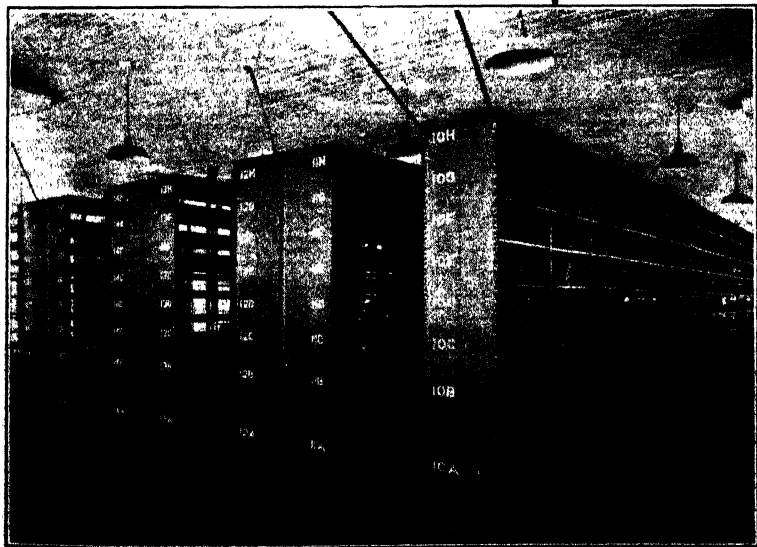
Pattern storage shelves of the Brown Lipe Gear Company. (*Courtesy of the Lyon Metallic Manufacturing Company.*)
